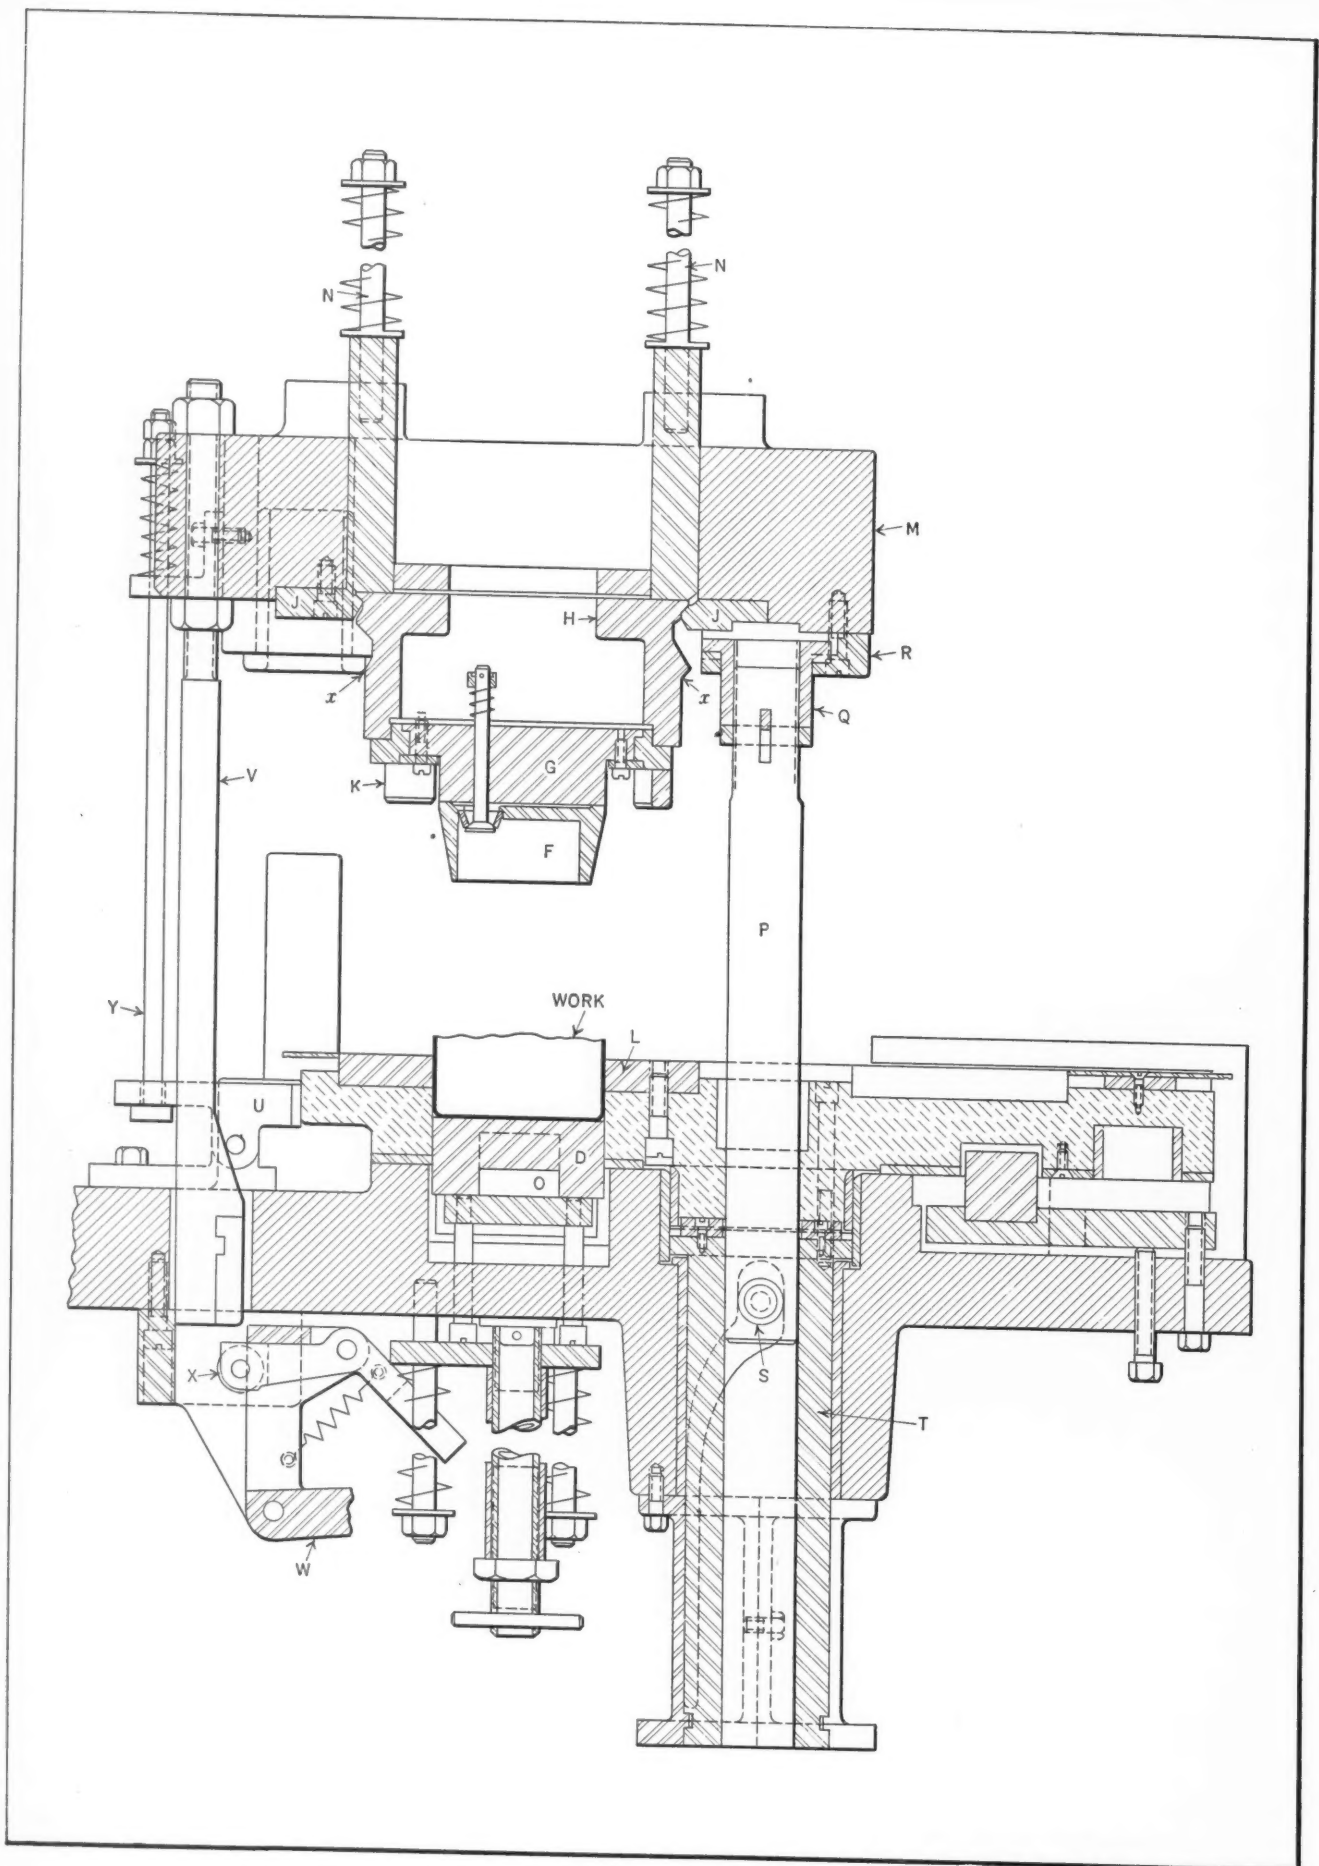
Sectional View Illustrating the Means Employed for Actuating the Trimming Die
